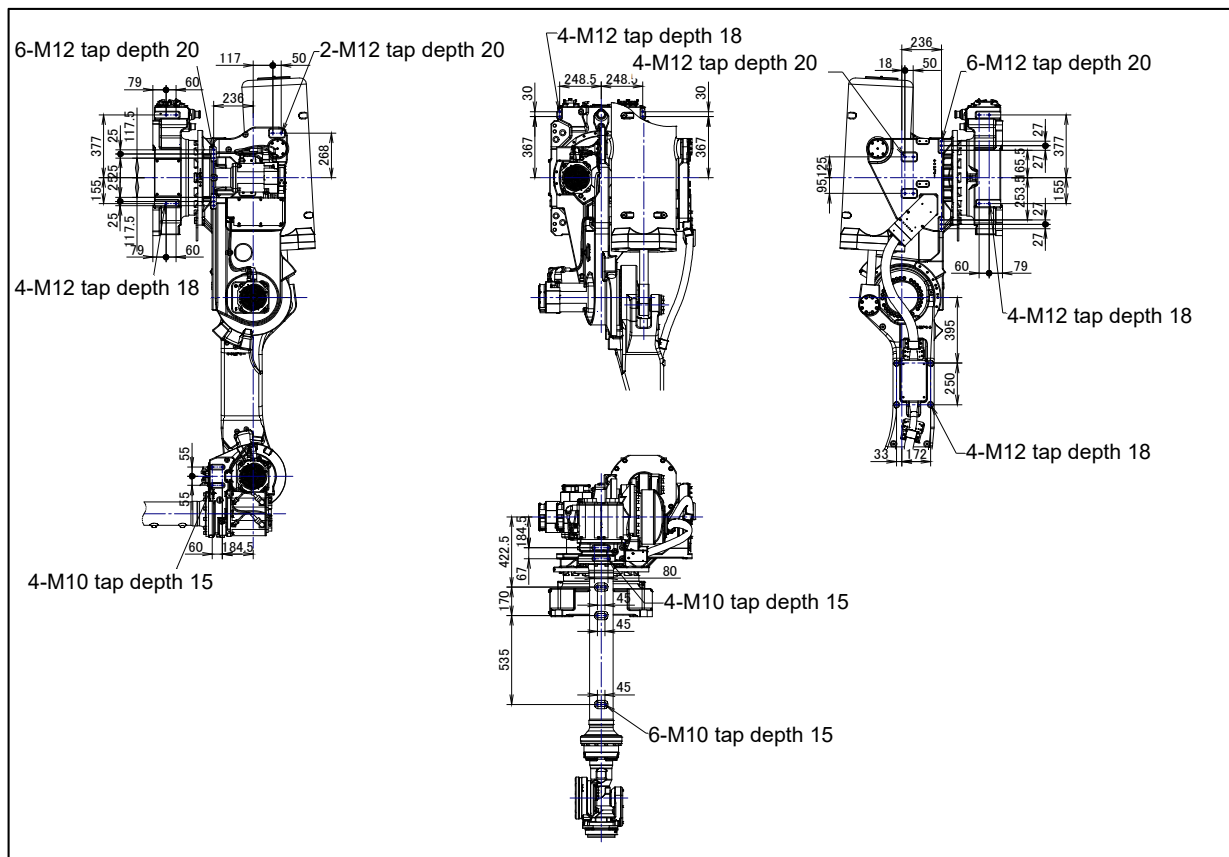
(e) Equipment mounting faces (R-2000iB/100P)
